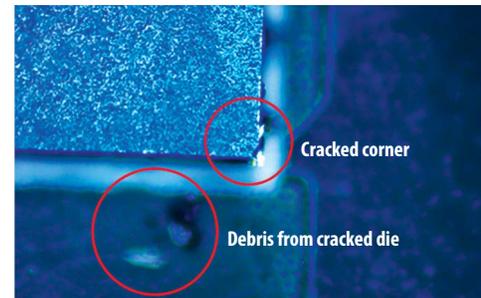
eGaN® Field failure showing die corner chipping caused by inadequate clearance of pick and place tool while placing components adjacent to the eGaN® FET.
